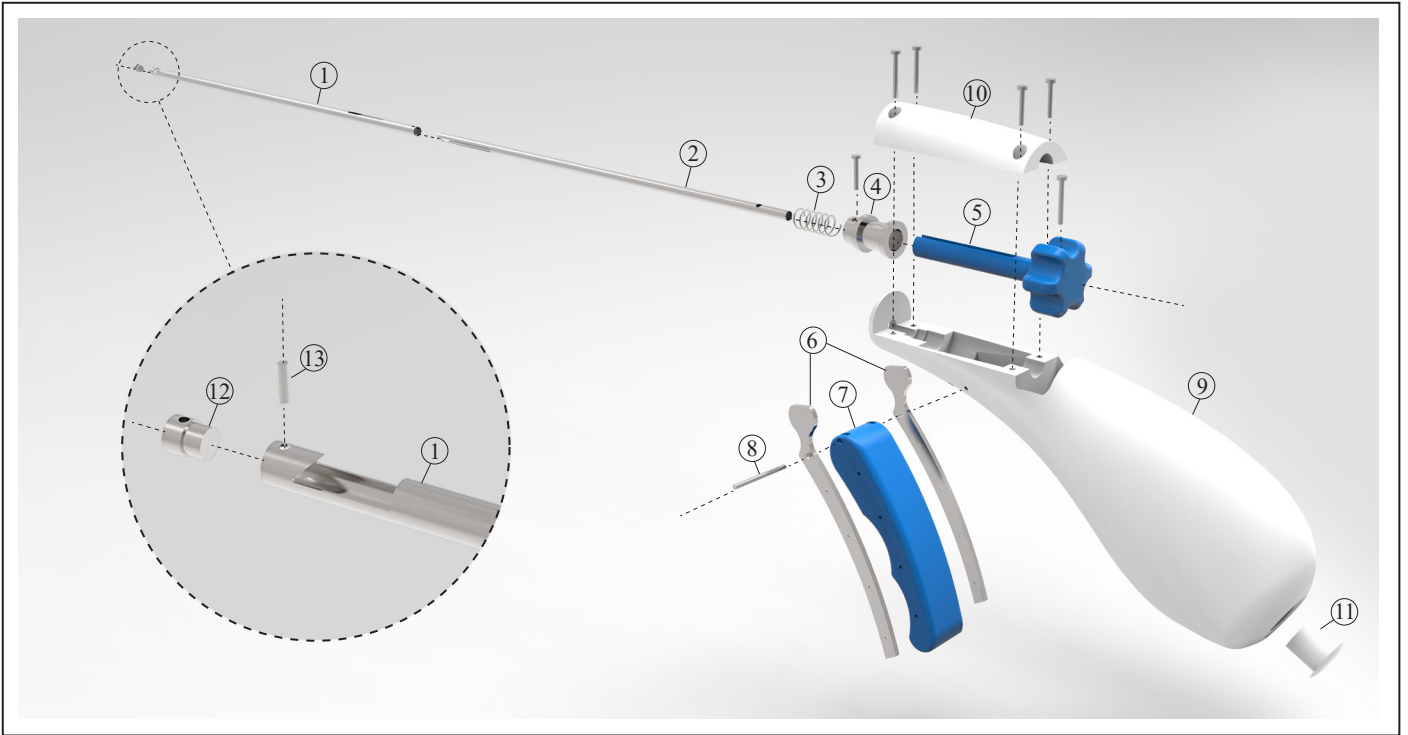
Exploded view of final design including all components: (1) outer shaft, (2) inner shaft, (3) spring, (4) transmission ring, (5) rotation-knob, (6) rotation-translation pin, (7) lever, (8) rotation axis, (9) handle part, (10) handle cap, (11) proximal cap, (12) distal cap, (13) dowel pin.
